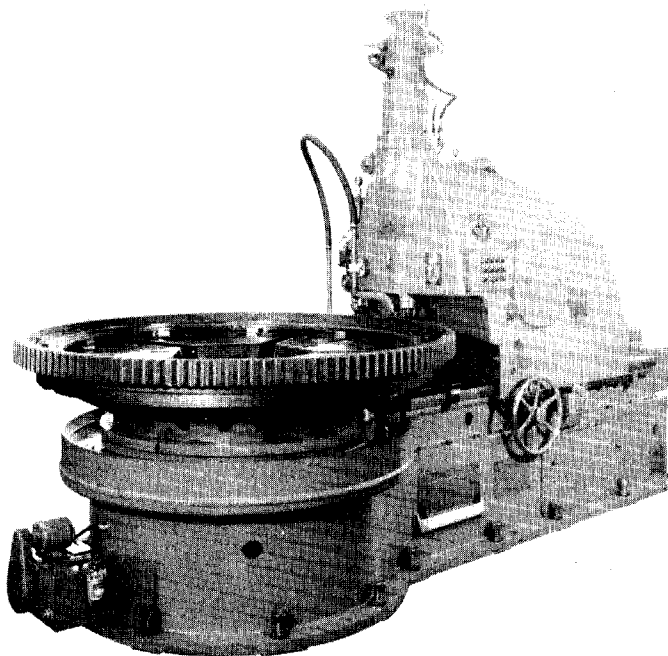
Vertical gear shaper is cutting a 120 in. (3050 mm) external gear. (Fellows Gear Shaper Co.)
